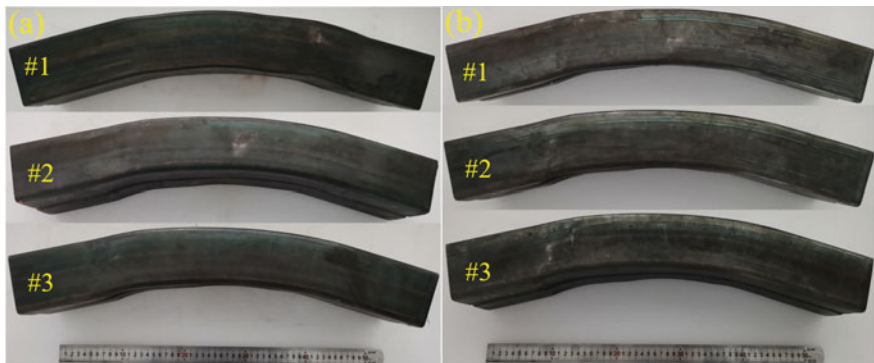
Appearance of the 22MnB5 steel pipe specimens #1, #2, #3 before delayed cracking test: a before cleaning, and b after cleaning
